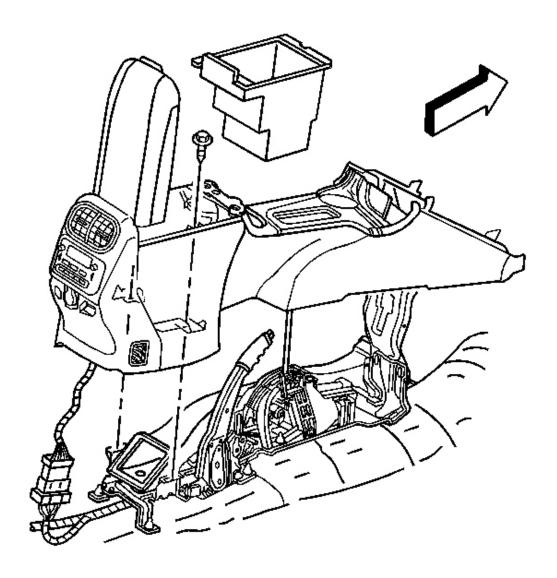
View Of Center Console Assembly Courtesy of GENERAL MOTORS CORP.
